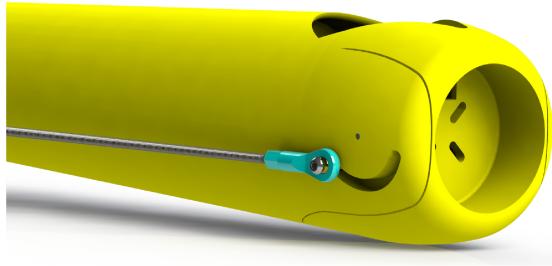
Nacelle view, showing the motor mount locked in forward flight.
